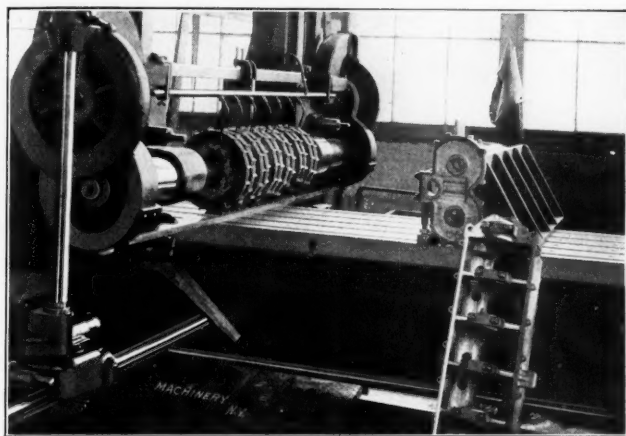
Milling the Ends of the Bearings of Aluminum Crank Casings for Pierce Automobiles
